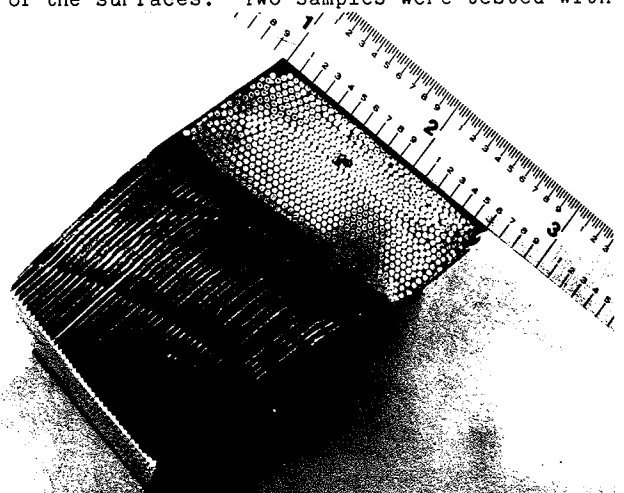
A section through the end of a test hexapole coil shows the relatively well ordered random wind, achieved by using a constant length end geometry.
